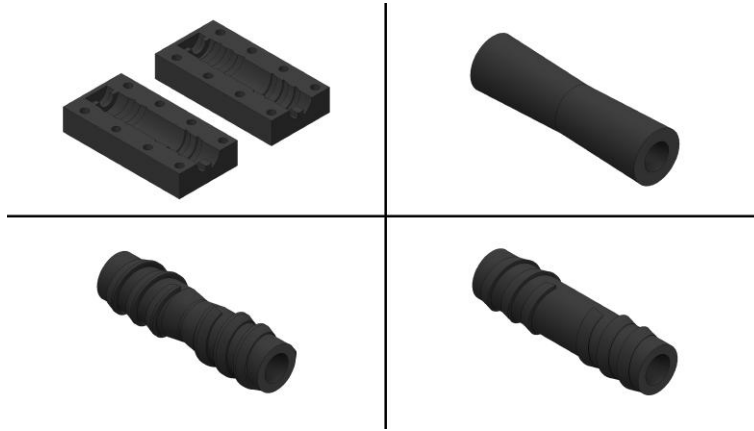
3D printed mold halves and dribbler prototype iterations
